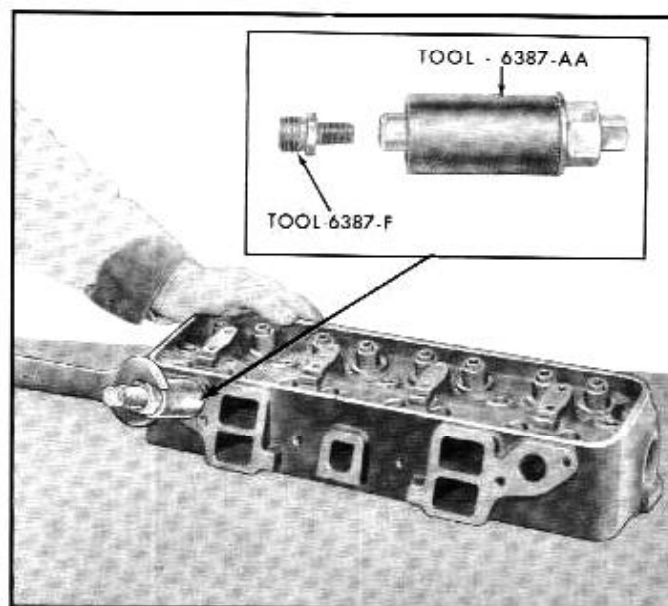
A-84—Removing Temperature Gauge Sending Unit Adaptor
